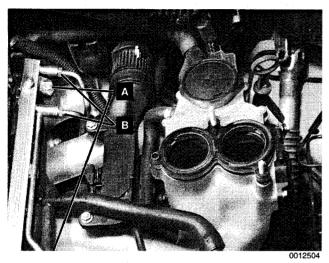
Location of fuel rail mounting bolts (A) and fuel inlet and return lines (B) on M44 engine. Upper manifold has been removed.
